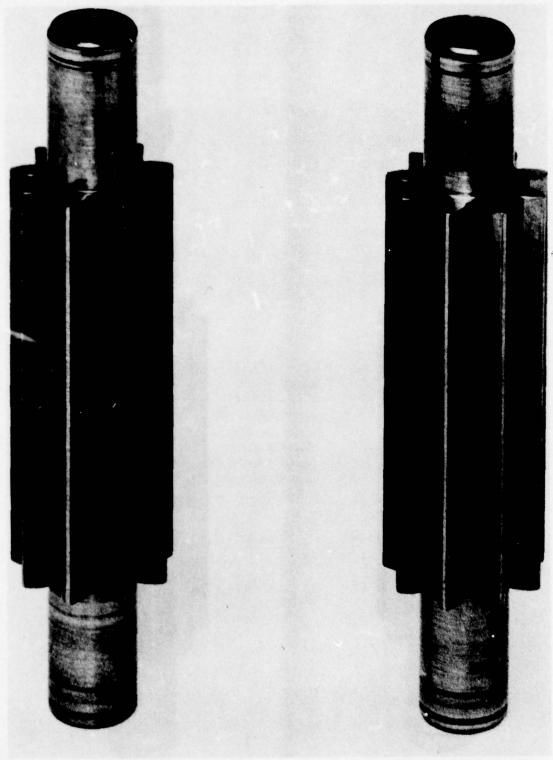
Supply Pump Gearshafts (Drive End), 40 Hours Run Time
